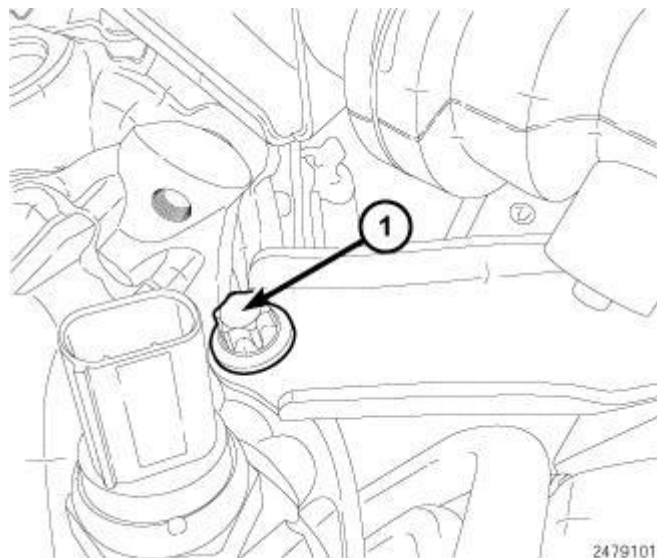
Timing Chain Upper Cover & Bolts
